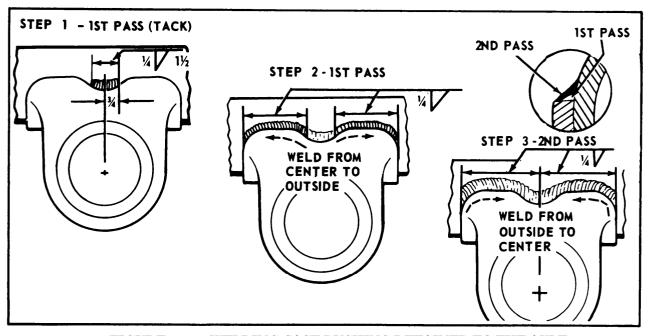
WELDING CAST BUSHING RETAINER TO THE AXLE.
